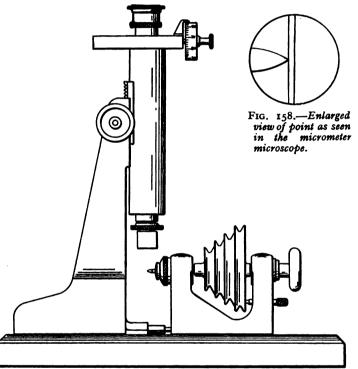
Micrometer microscope measurer for position of point of tool.
